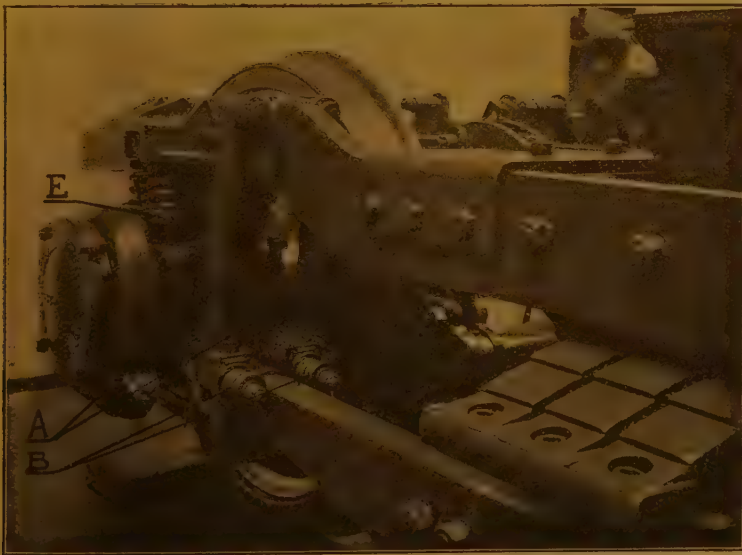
Details of the springing, type BF10 Brill bogie.
